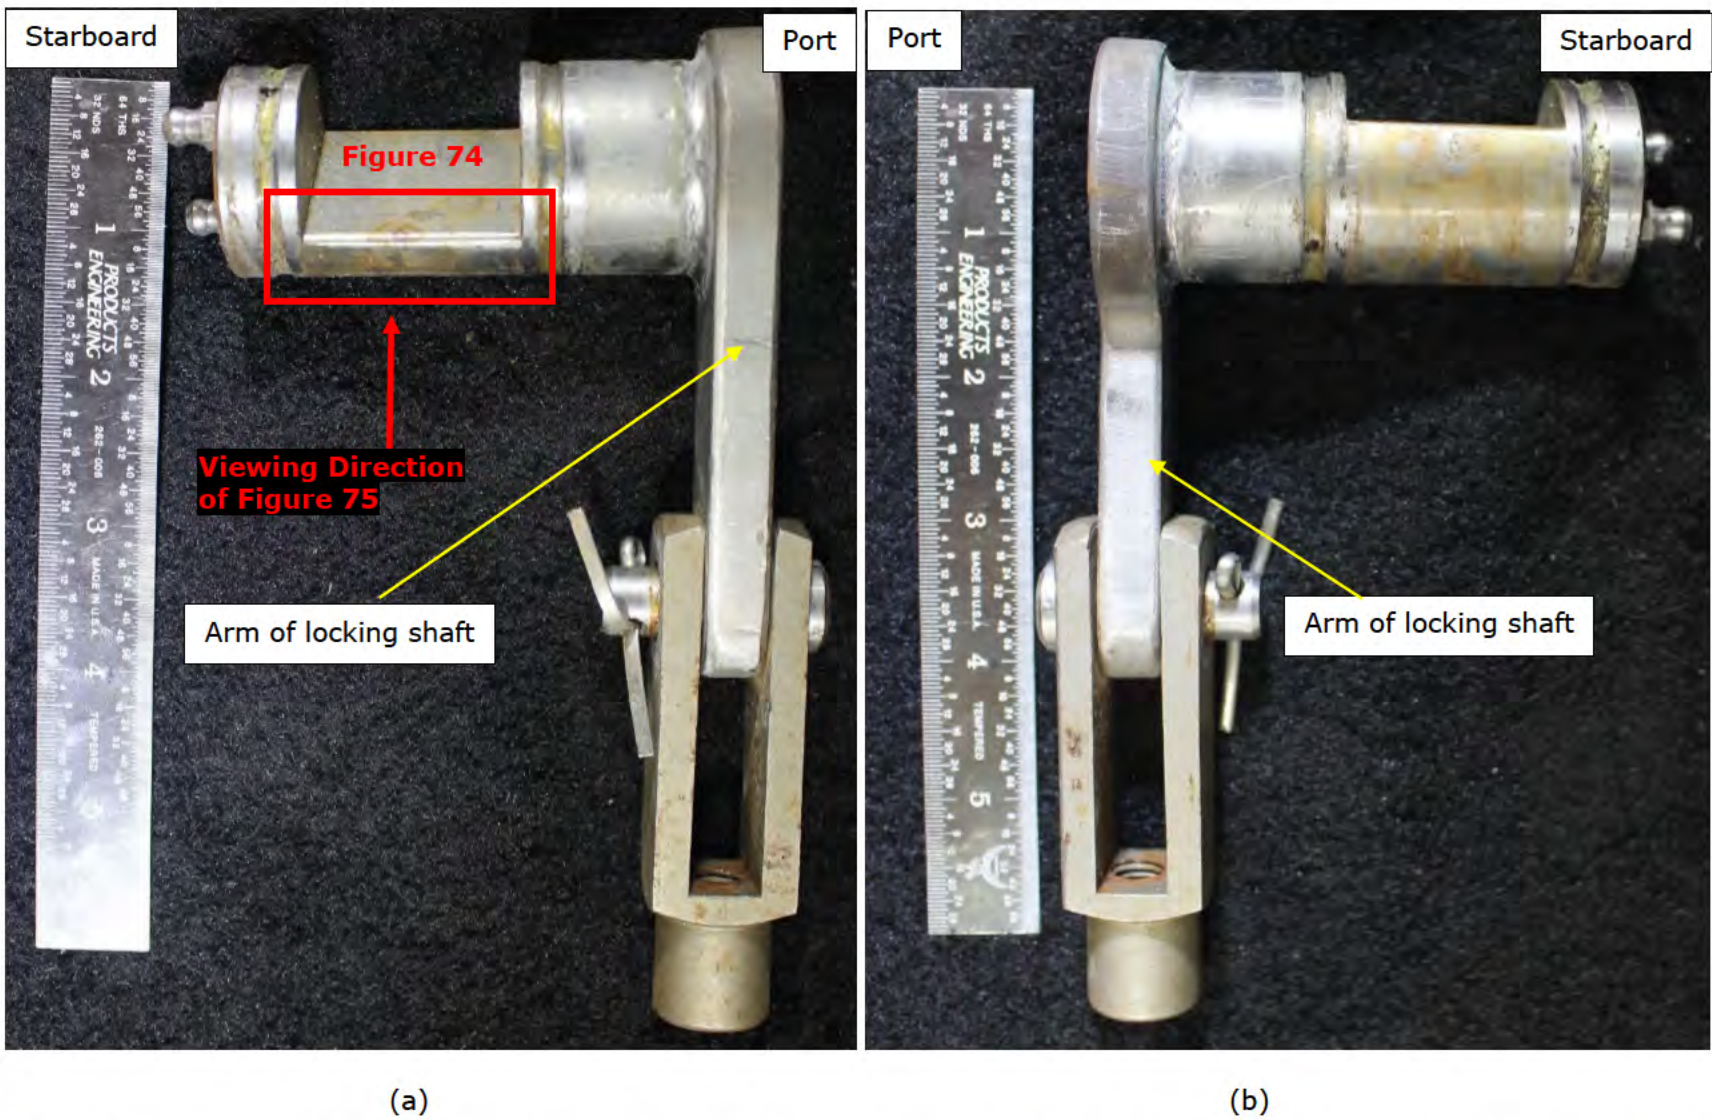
Photographs of the locking shaft from the Subject Forward Hook showing the (a) round side and (b) the flat, after disassembly. Rulers are in inches.
